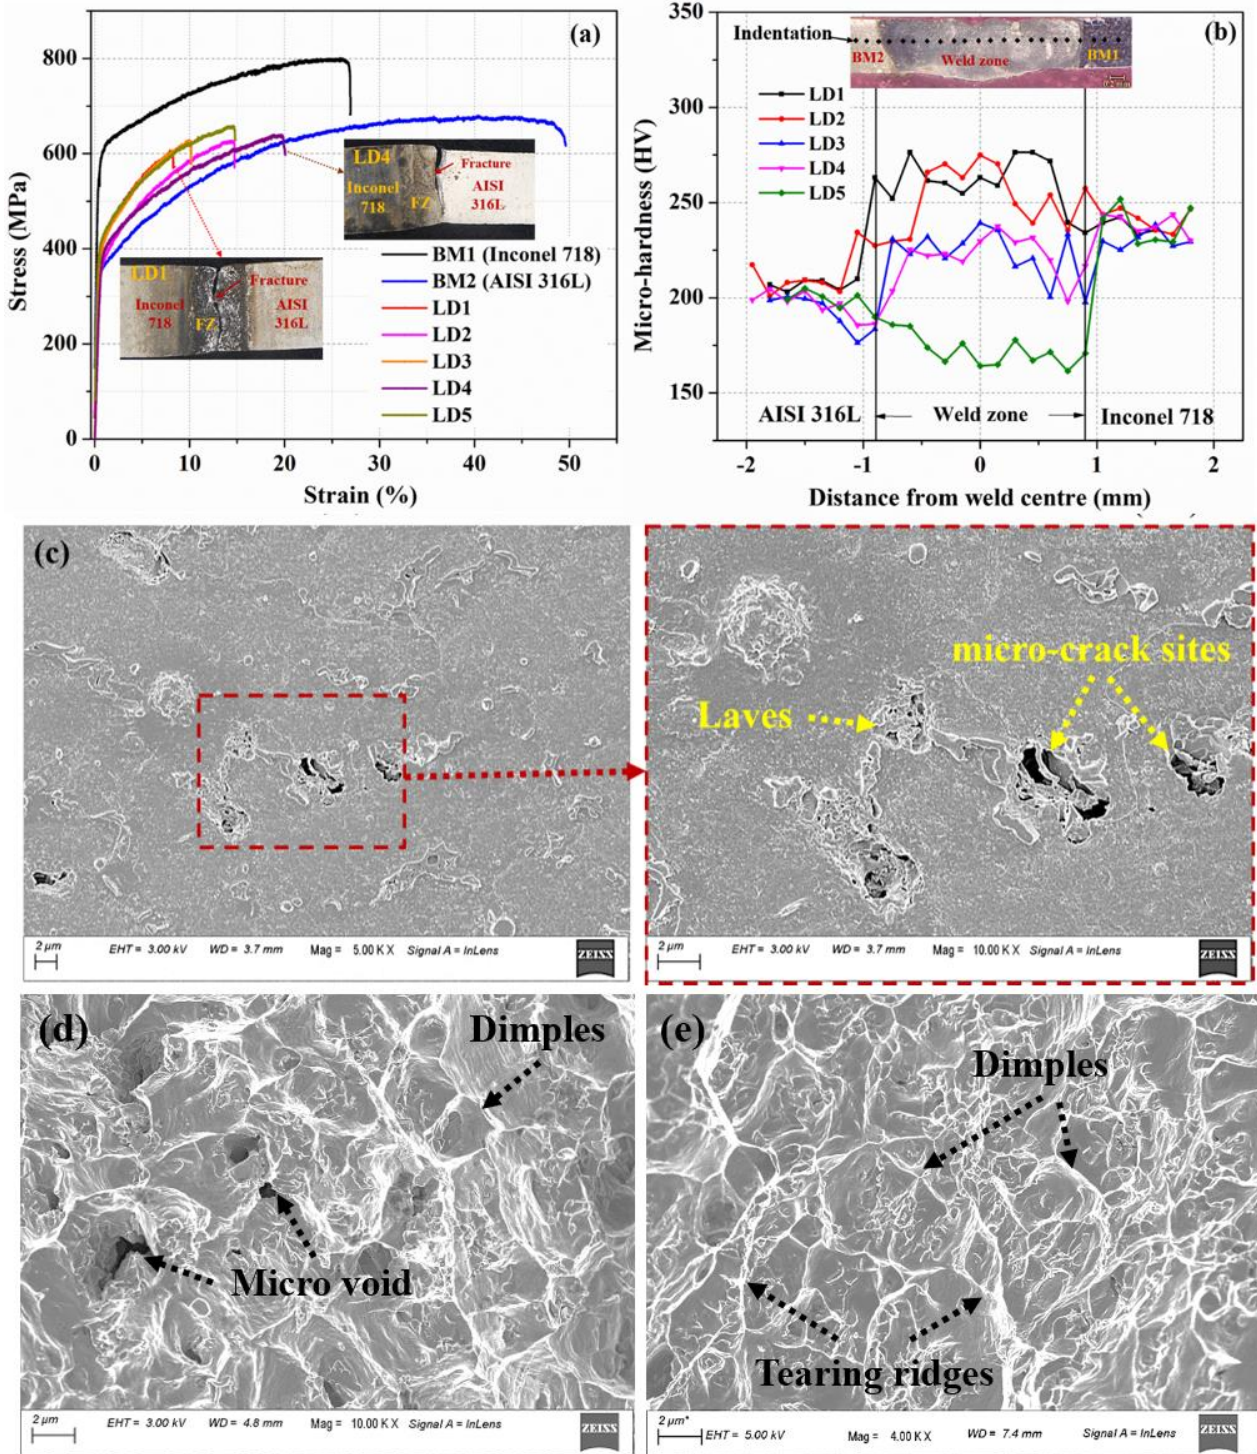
Tensile stress-strain curves along with fracture location for welded samples; (b) hardness distribution of welded samples (c) location of crack sites in final solidified structure and (d, e) tensile fracture surfaces of LD1 and LD5 weld respectively
